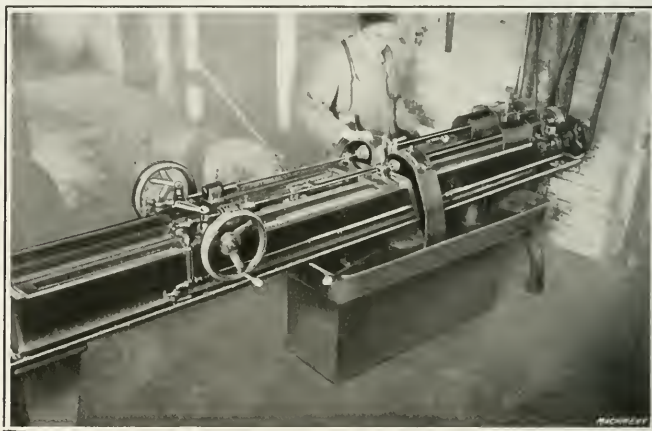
Pratt & Whitney Gun Barrel Drilling Machine
